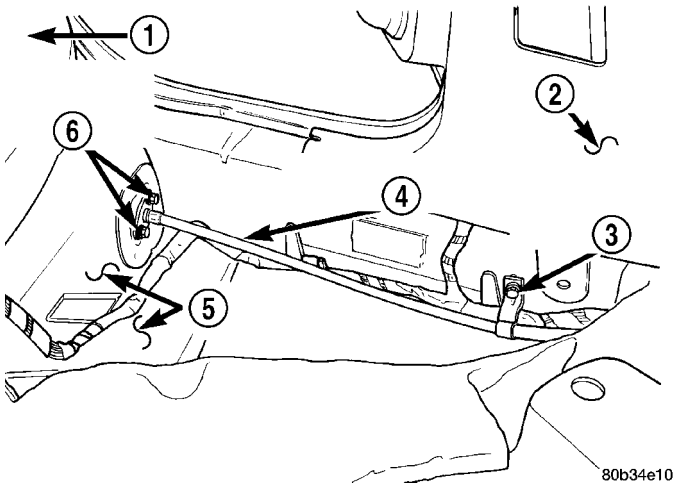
Front Park Brake Cable At Rear Floor Pan
